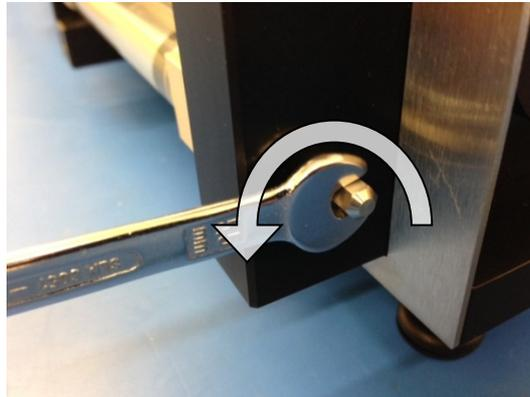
Loosen the cylinder adjusting screw (right hand piston shown)
